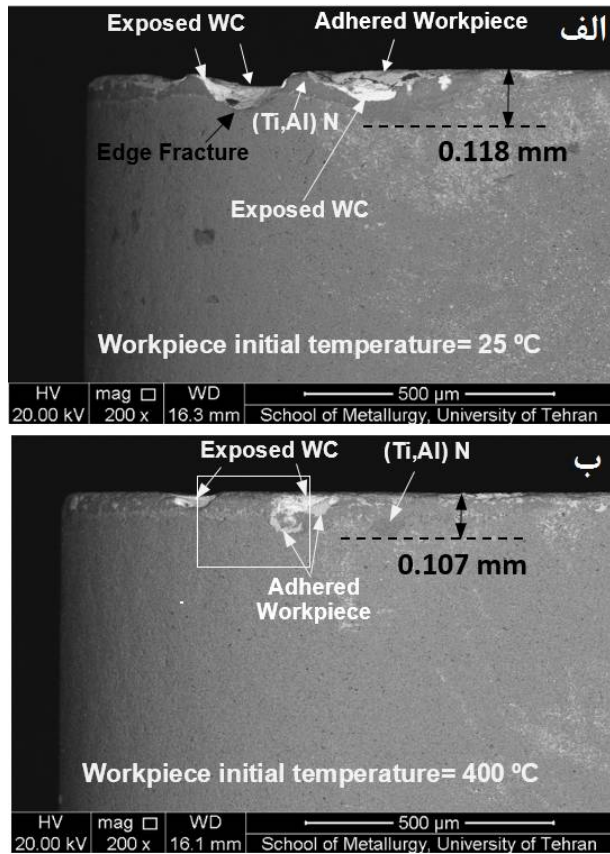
Cutting tool flank wear after 3 minutes cutting at cutting speed 96m/min and feed 0.175mm/rev
